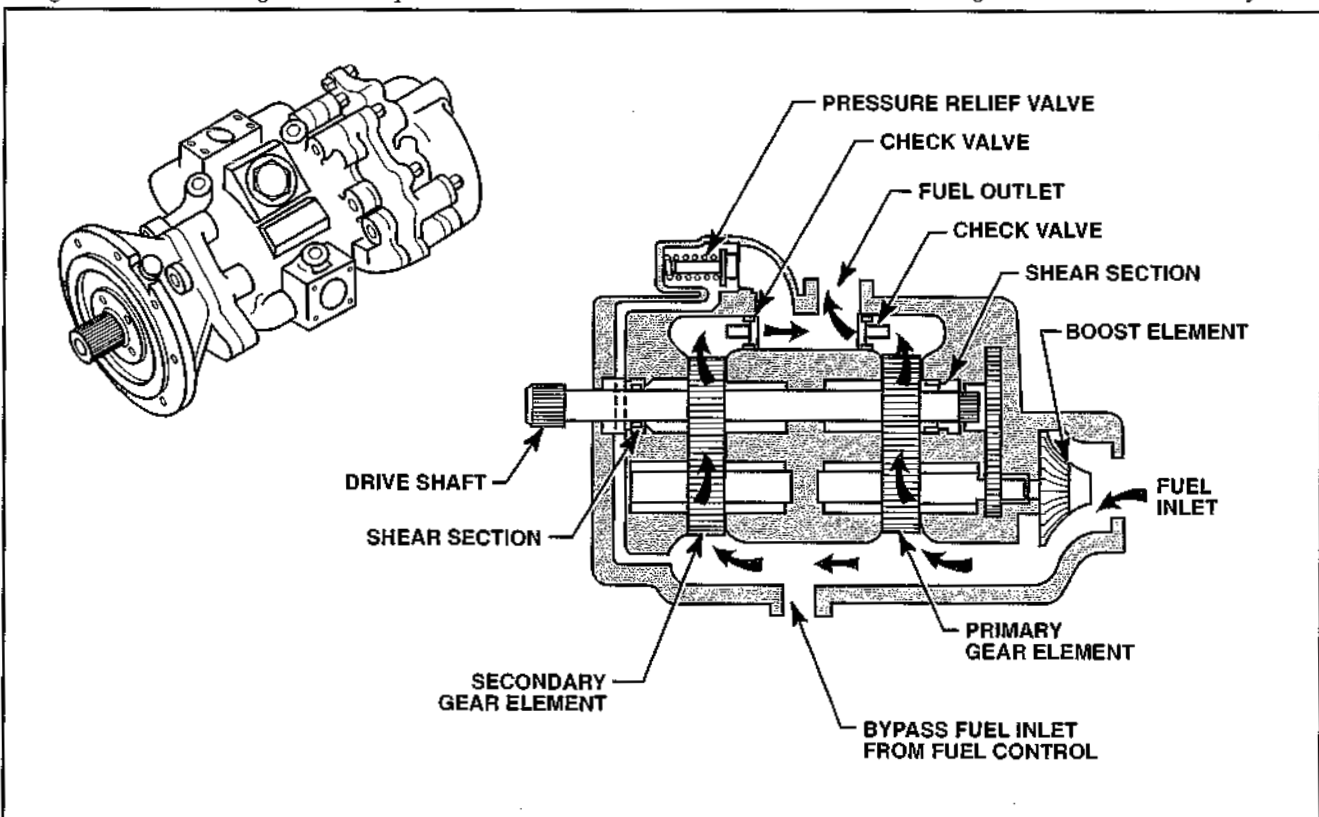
A typical engine-driven fuel pump for a turbine engine contains a centrifugal boost pump impeller, dual gear pump elements, check valves, and a relief valve.
